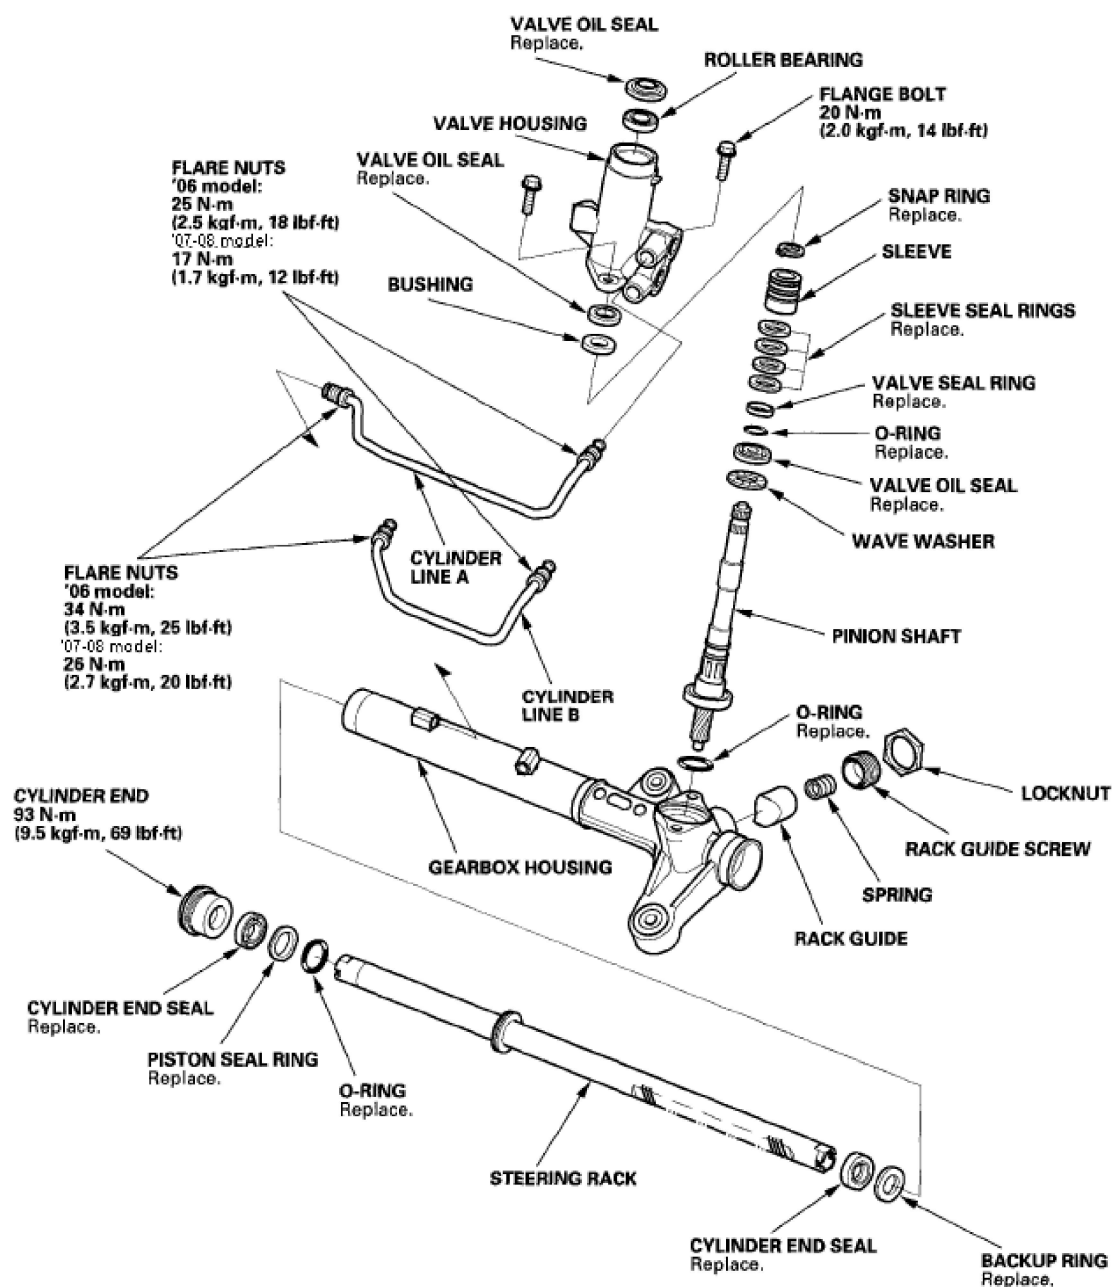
Exploded View Of Steering Gearbox (With Torque Specifications)
